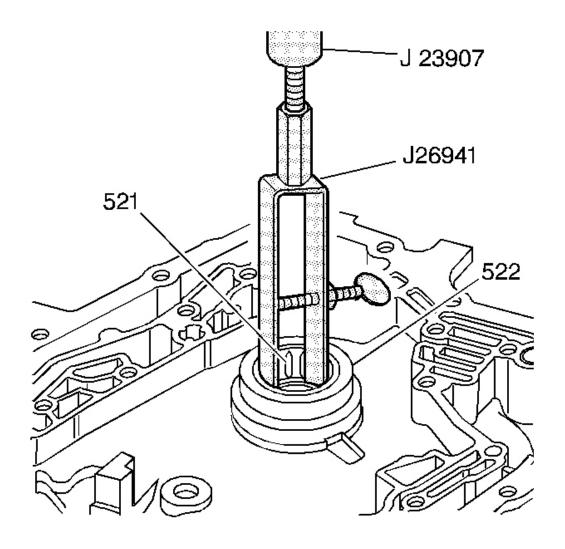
Removing Bearing Assembly From Drive Sprocket Support Courtesy of GENERAL MOTORS CORP.
